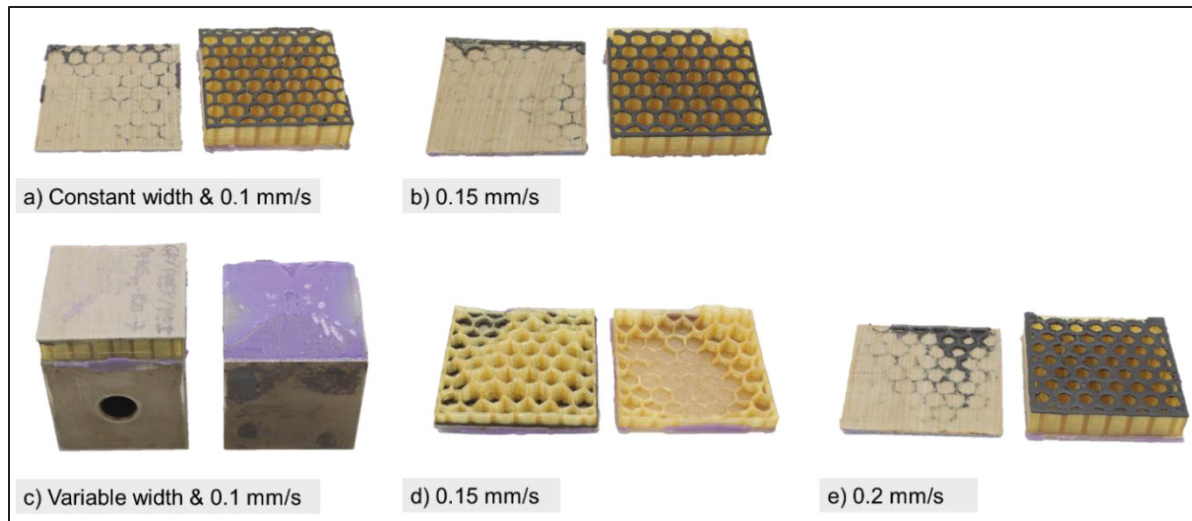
Fractured FWT samples welded with (a) and (b) constant susceptor width and welding speed of 0.1 and 0.15 mm/s, respectively (no welding was obtained at 0.2 mm/s), and (c), (d) and (e) variable susceptor width welding speed of 0.1, 0.15 and 0.2 mm/s, respectively
